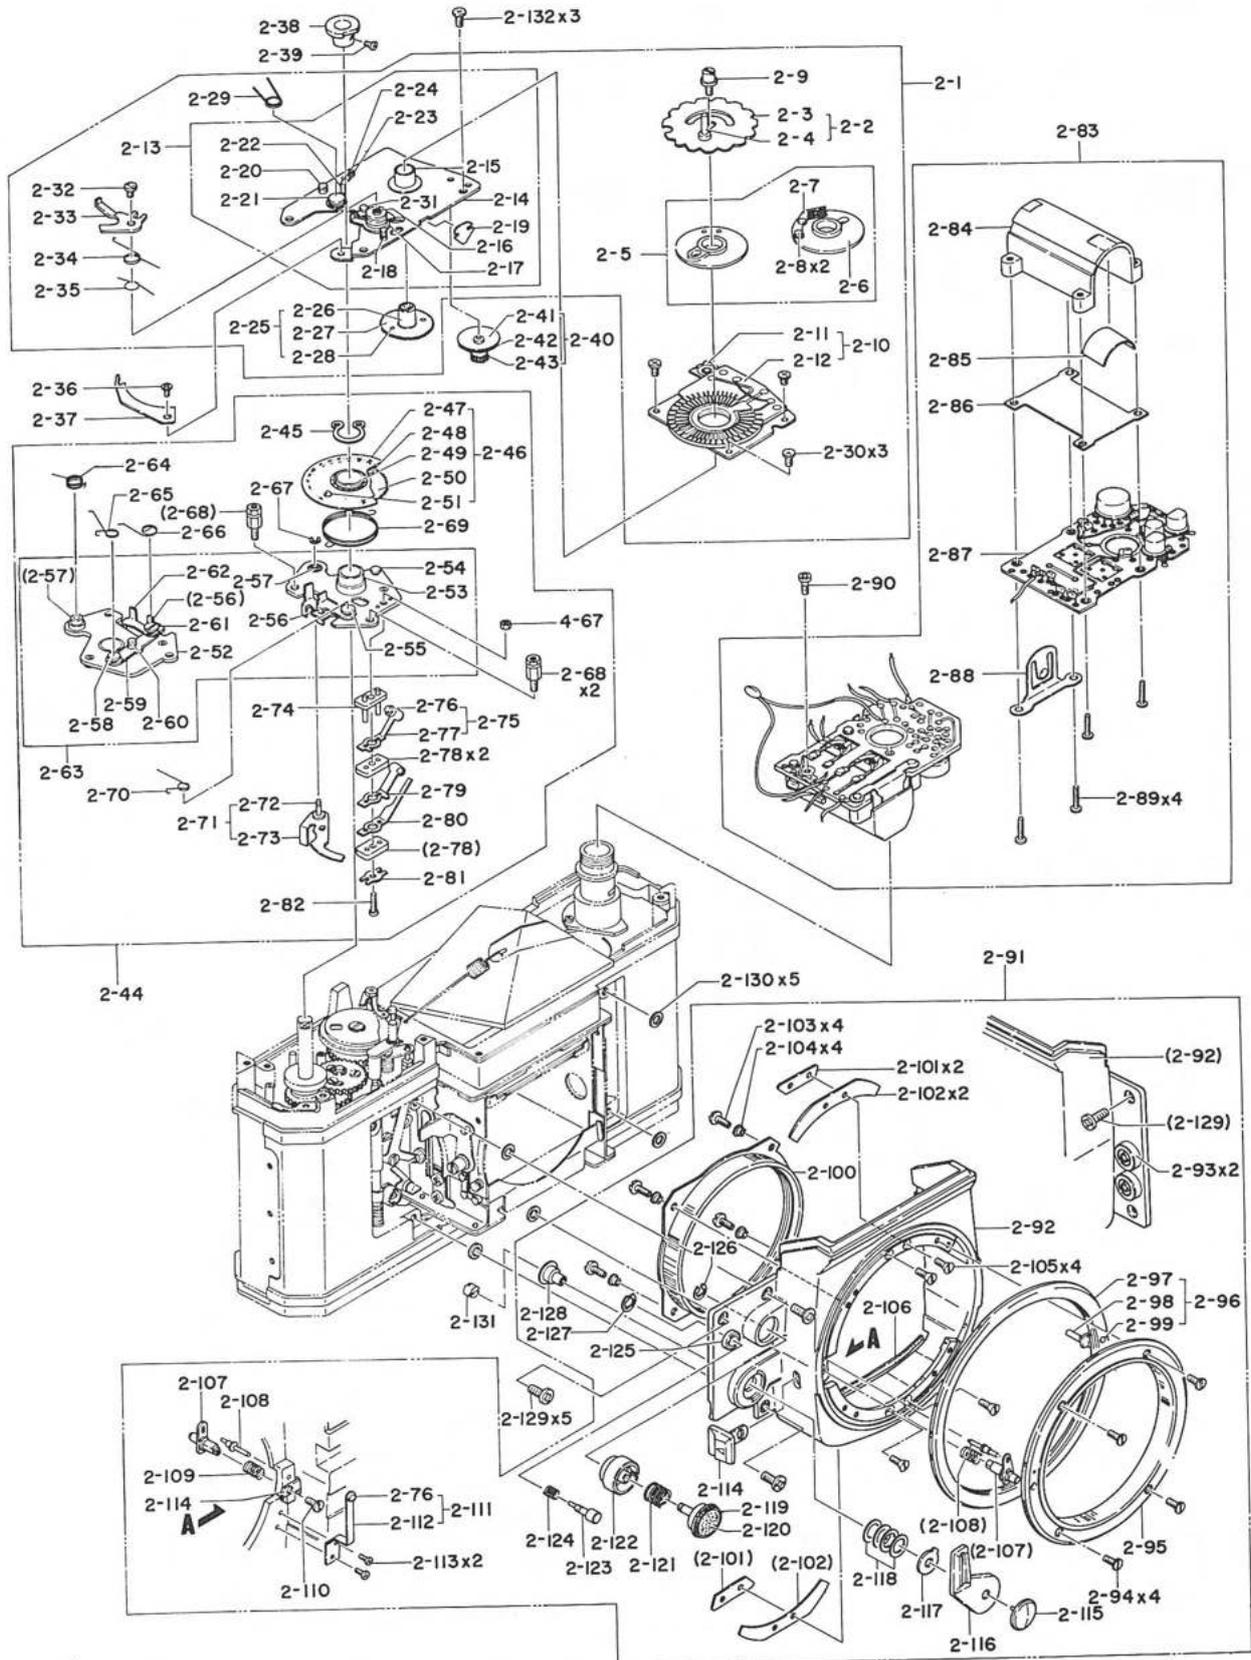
Exposure counter · Amplifier · ASA Printed circuit board · Lens mount
